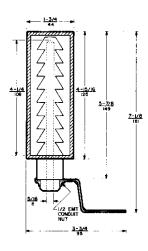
M-2500 Dimensions  $\frac{\text{in.}}{\text{mm}}$
